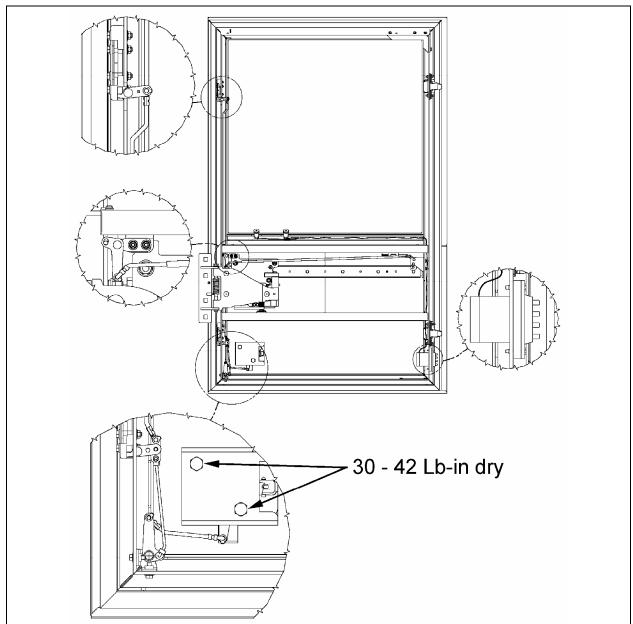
WCL SLIDING DOOR OPENING MECHANISM
